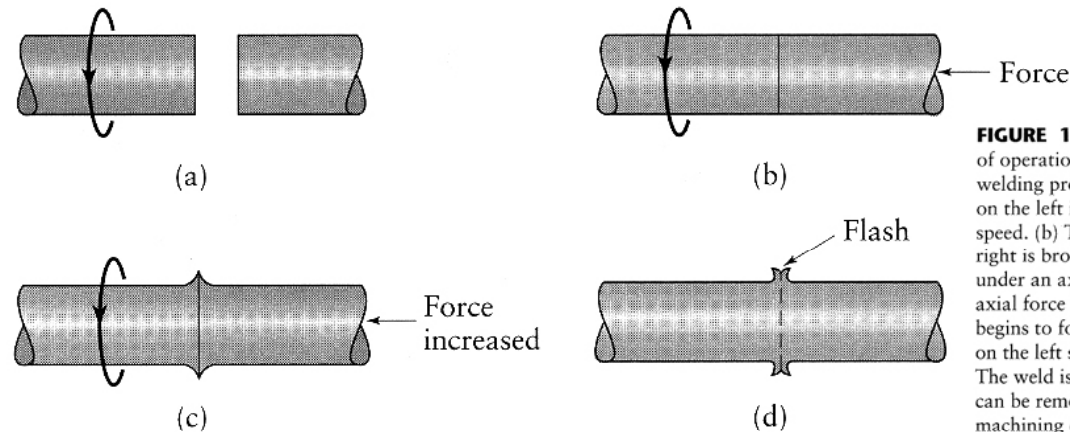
Sequence of operations in the friction-welding process. (a) The part on the left is rotated at high speed. (b) The part on the right is brought into contact under an axial force. (c) The axial force is increased; flash begins to form. (d) The part on the left stops rotating. The weld is completed. Flash can be removed by machining or grinding.
